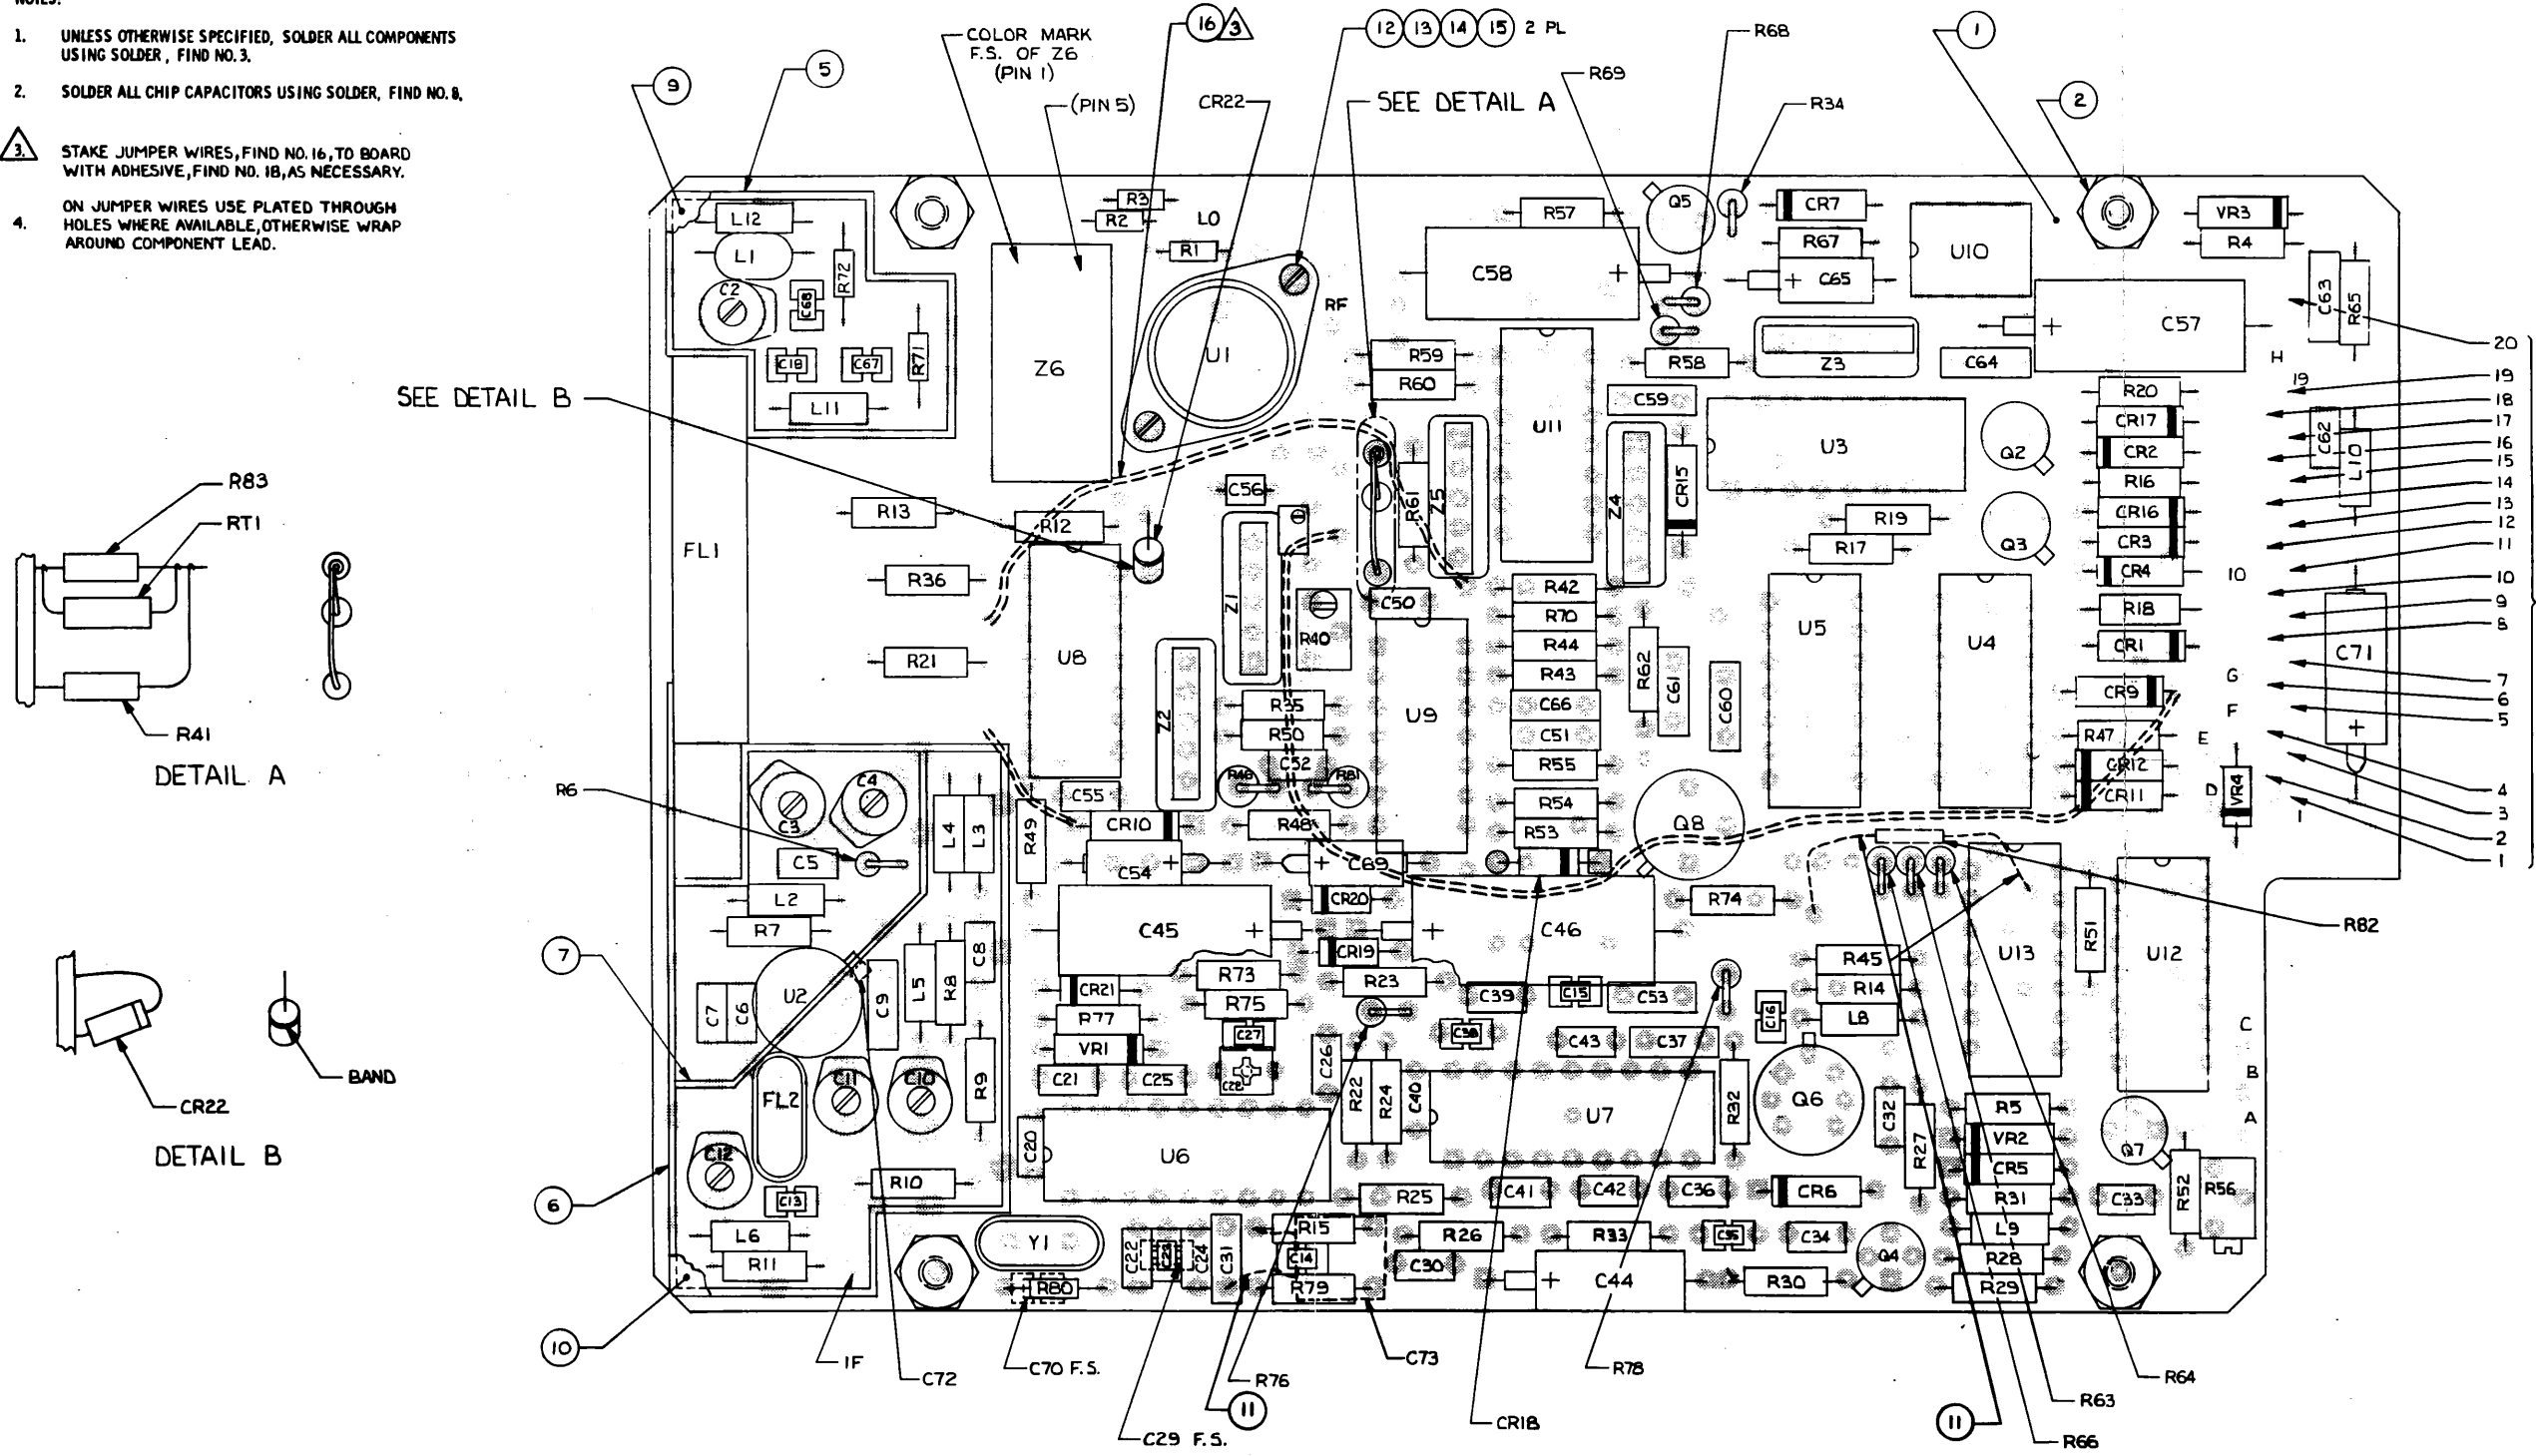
Receiver Circuit Card 1A5A1 Parts Location (Sheet 1 of 2)
